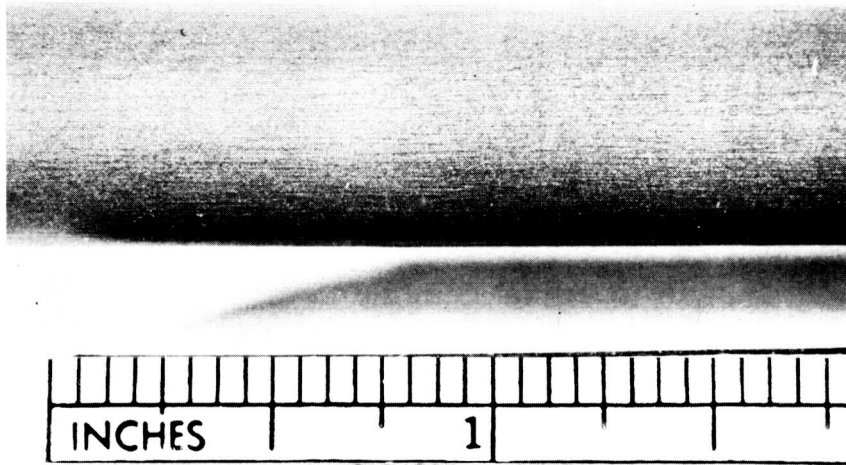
SECTION OF EXTRUDED ASTROLOY ROD (REF. 15)
